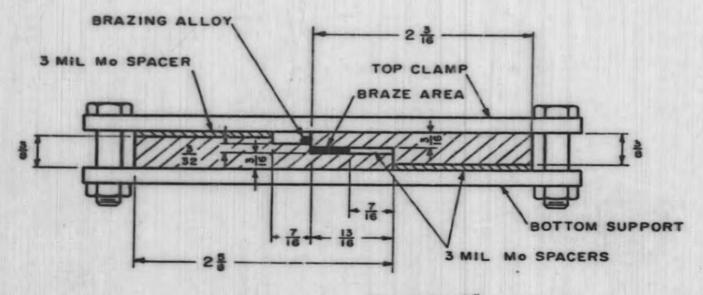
CLAMPING ARRANGEMENT FOR BRAZEMENTS.
